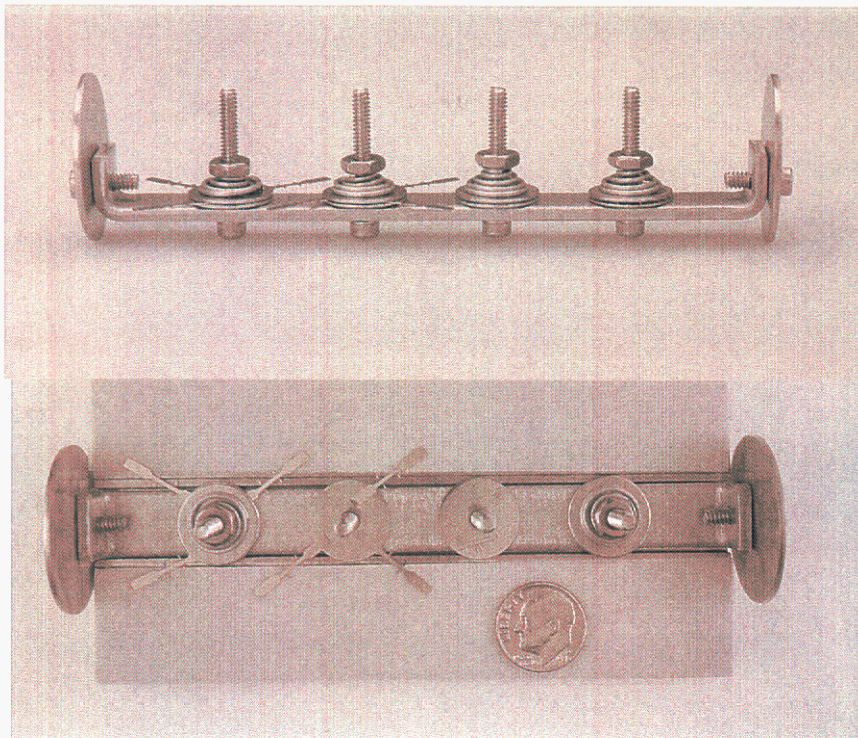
Side (top) and plan view (below) of clamping fixture used to hold test specimens.
